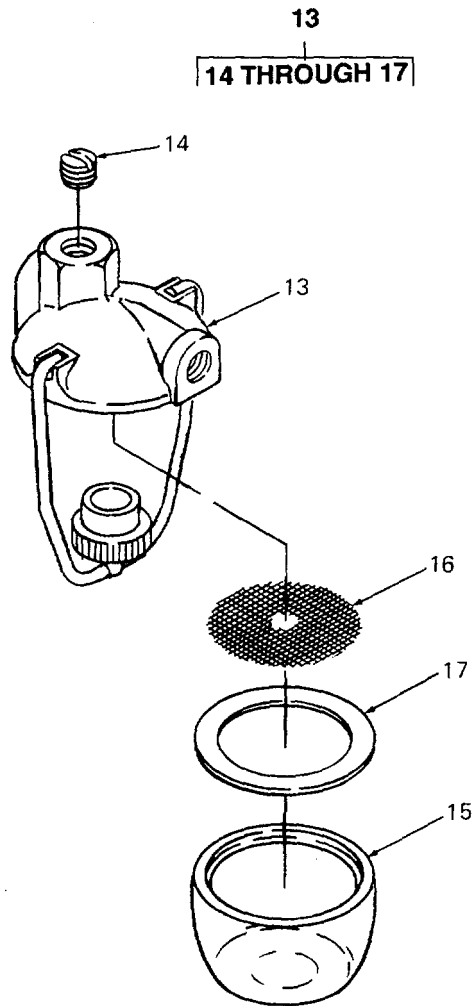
Fuel Pump, Strainer, and Components (Sheet 3)
